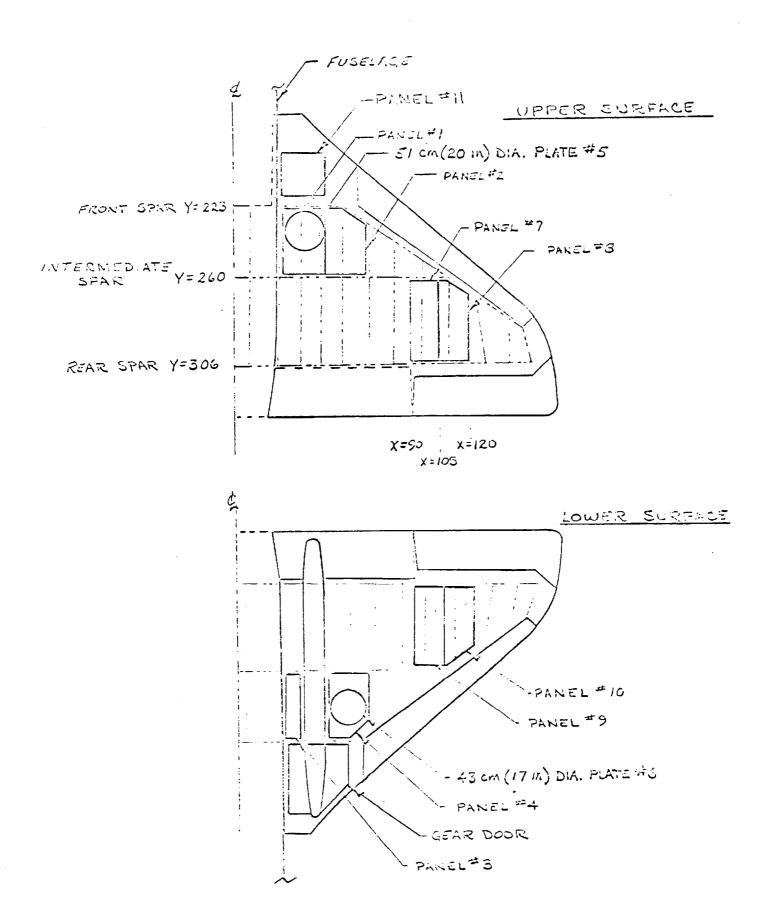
HOLE CONFIGURATION #8. PANELS 7,8,9,&10 REMOVED
